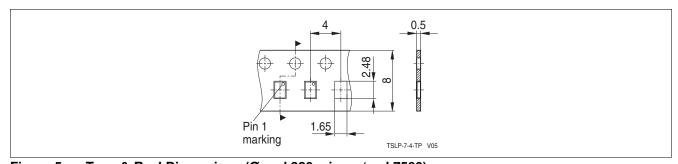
Tape & Reel Dimensions (Ø reel 330, pieces/reel 7500)
